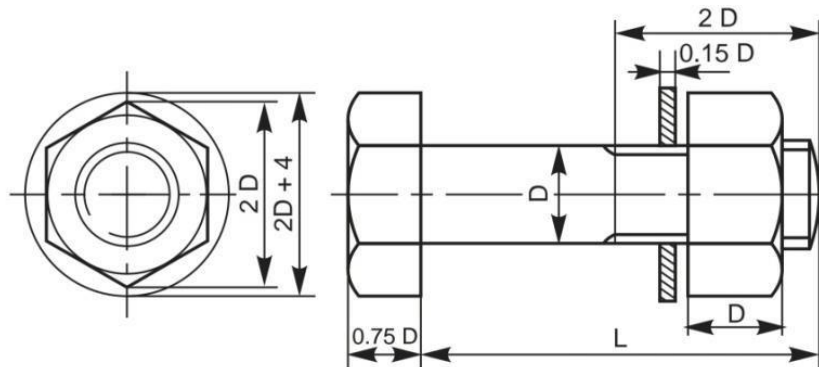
A hexagonal headed bolt with a nut and a washer in position
